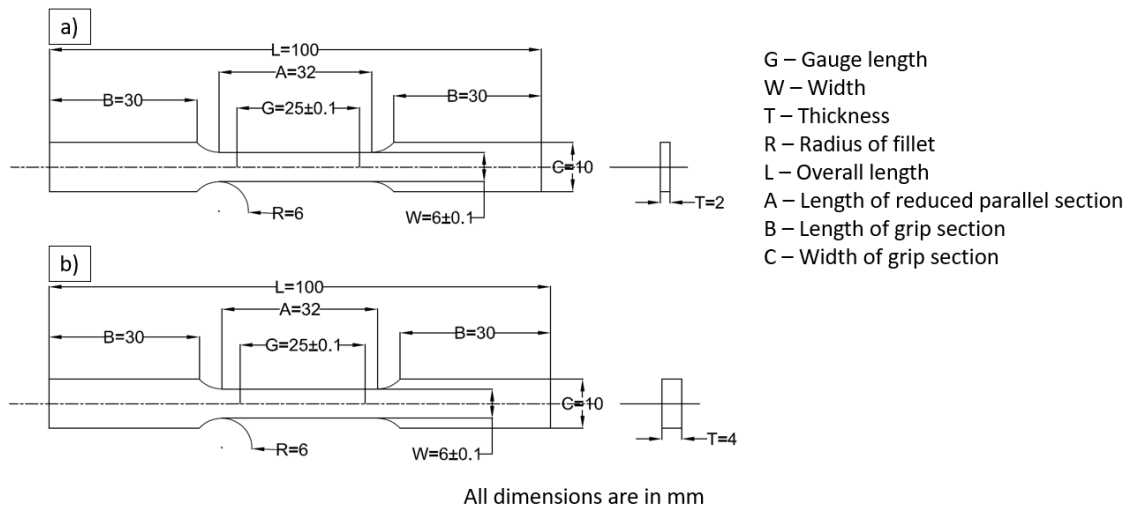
Tensile Specimen dimensions a) 2 mm thick specimen b) 4 mm thick specimen
